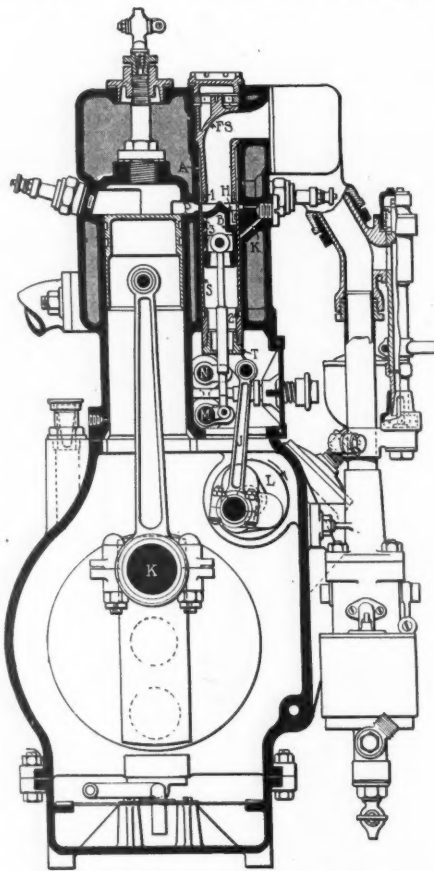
SECTIONAL VIEW OF THE ROCKEFELLER
